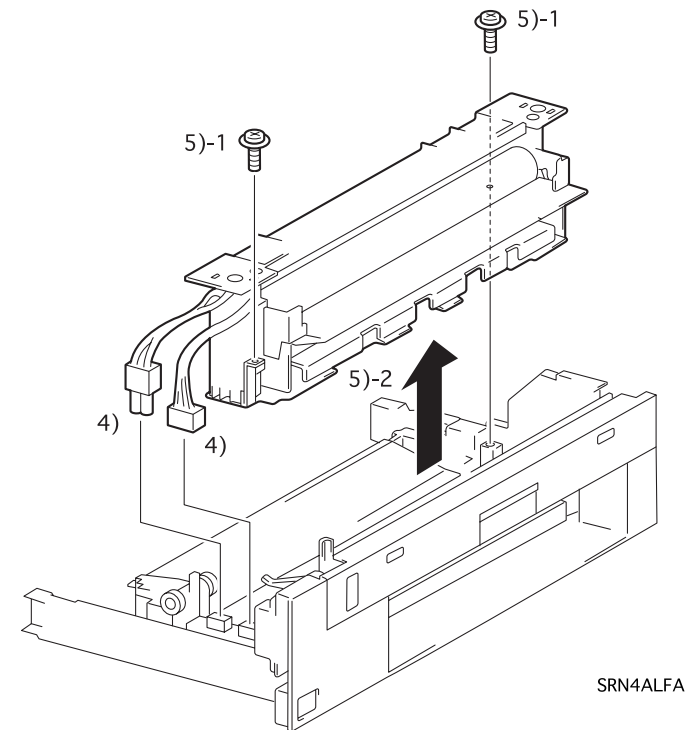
MAIN FUSER ASSEMBLY Removal
